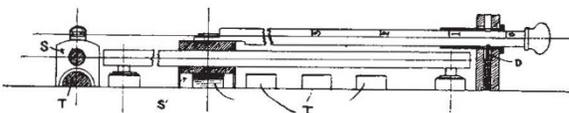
Showing construction of slider, spring contact bar, &c.
